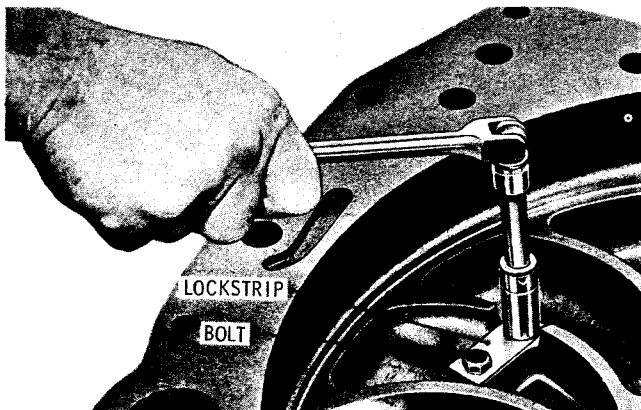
Removing pitot tube bolts (CBT, CLBT, VCLBT)
